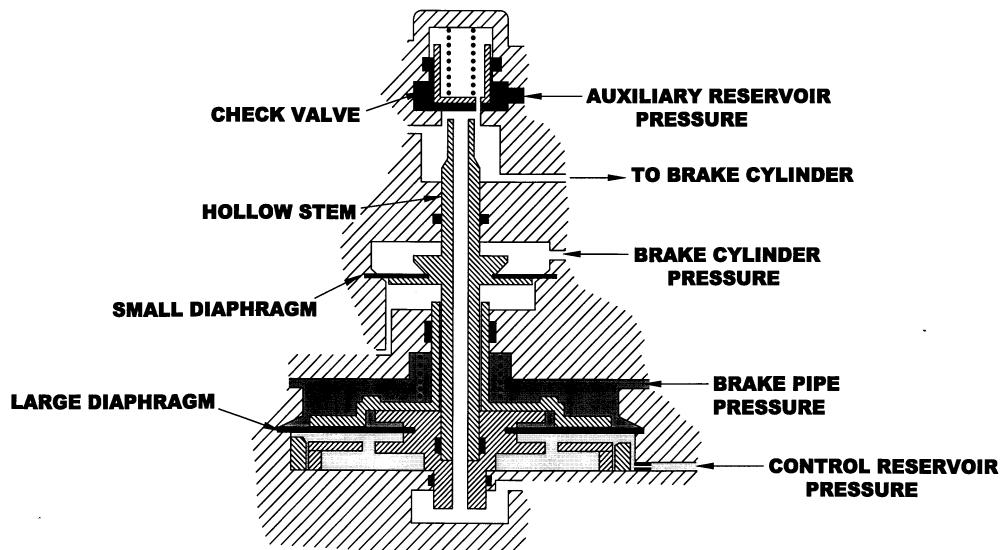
SECTIONAL VIEW OF MAIN VALVE
